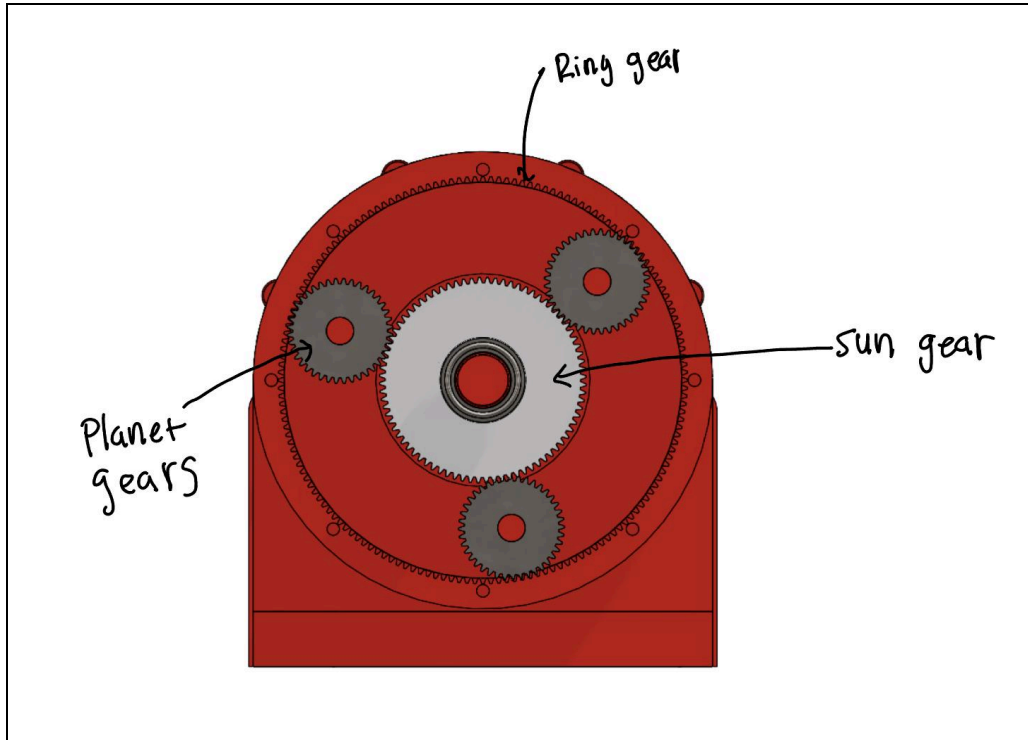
Planetary gearbox consisting of 3 main components; a ring gear, sun gear, and planet gears
